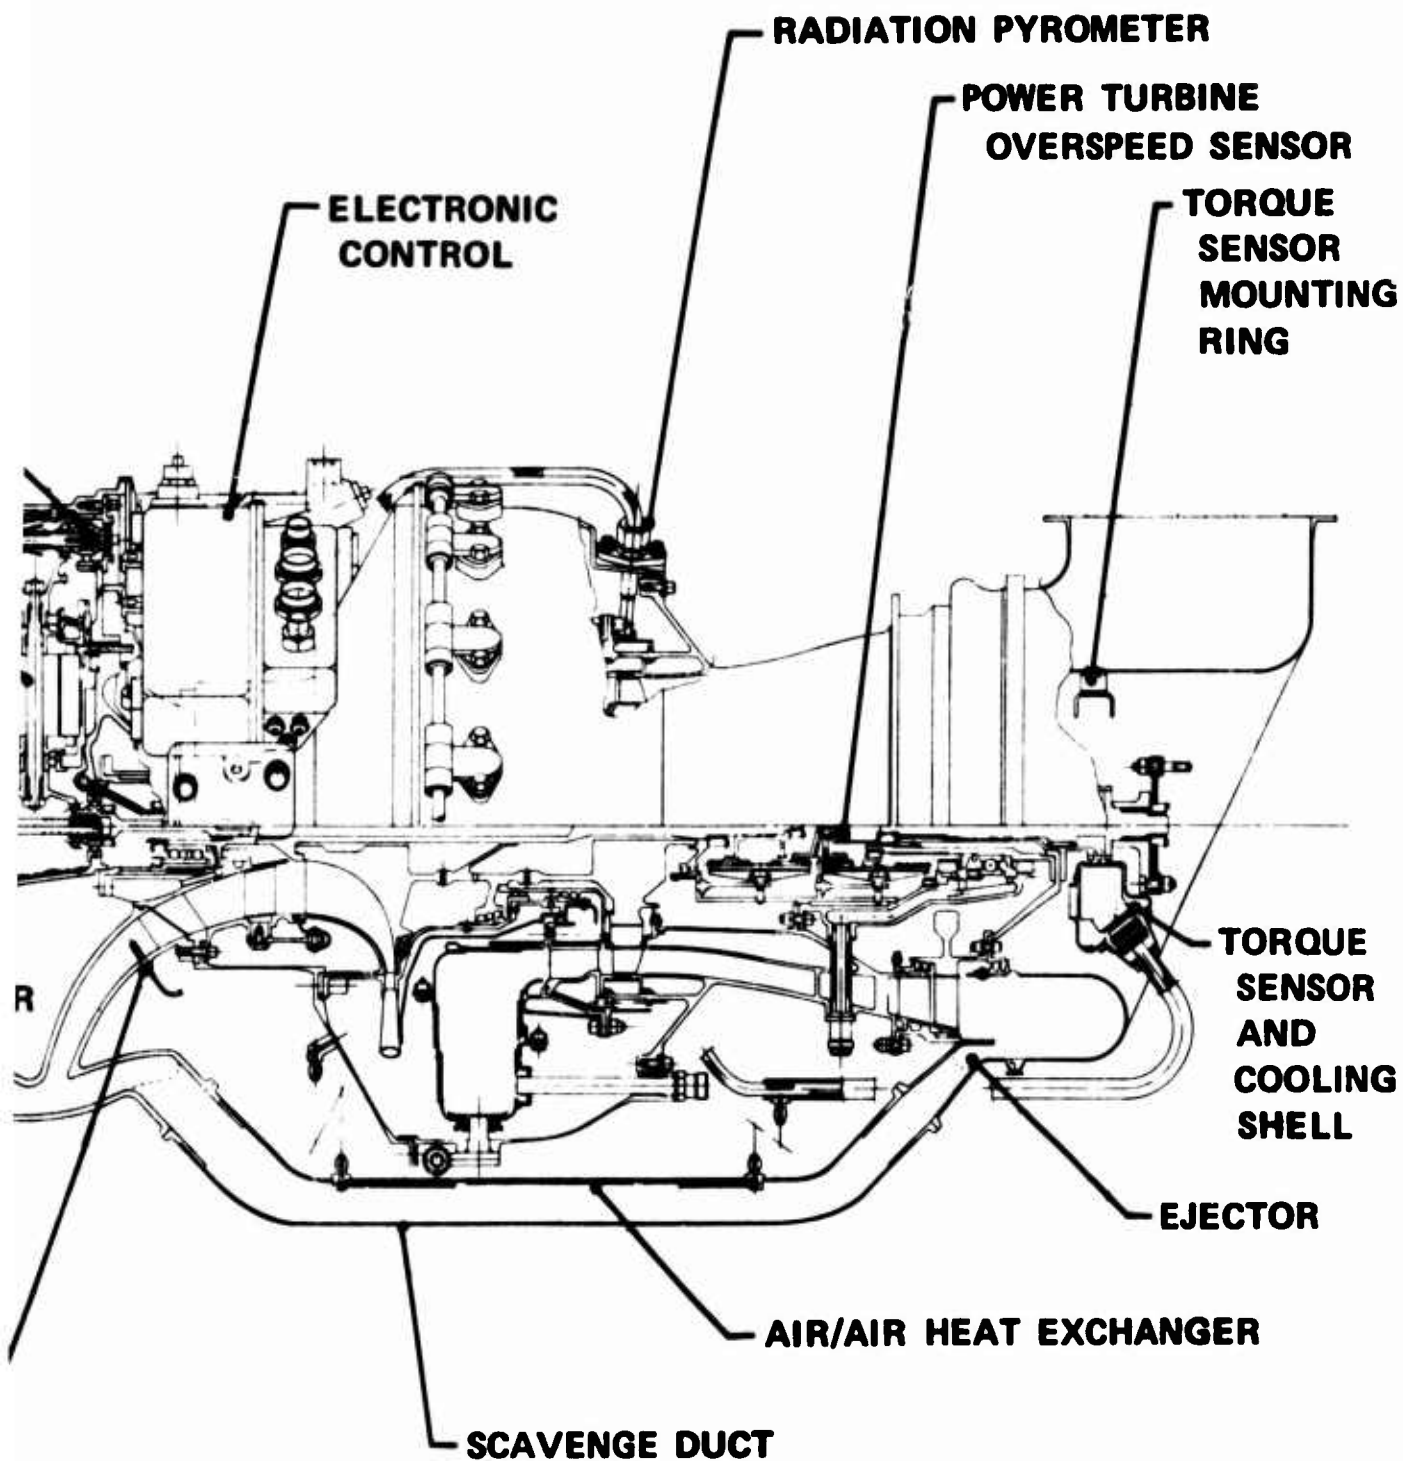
Final Tower Shaft Drive/Air Turbine Starter Engine Cross Section
